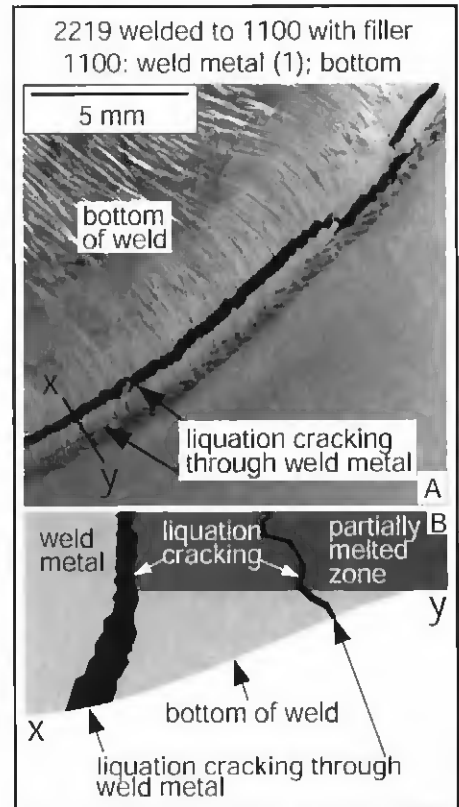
Cracking at bottom of weld. A — Bottom surface of weld in Fig. 3B; B — transverse cross section along line "xy," sketched according to micrograph observed (not shown due to space limit).
